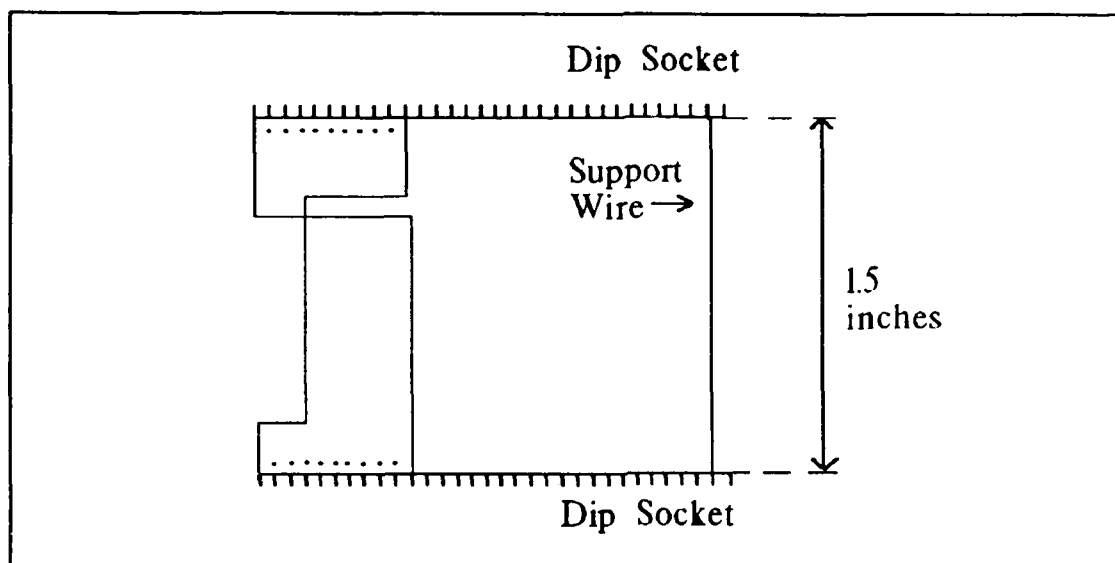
Adapter to Position the Packaged CHEMFET Upright when Inserted into the Sensor Cell.
